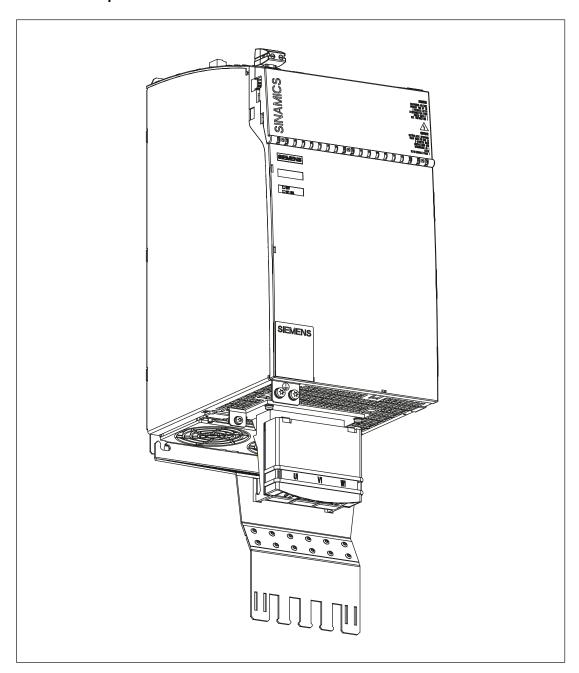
Shield connecting plate for a 200 mm module with internal air cooling
